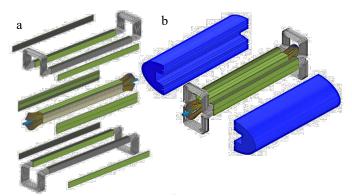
Blow-up illustration of the winding and assembly of the hybrid dipole. a) The outsert winding is fabricated as two halves while the insert is fabricated; b) The outsert is then assembled with Inconel supports (green) around the insert winding, the flux returns are slid on, and preload is applied.
